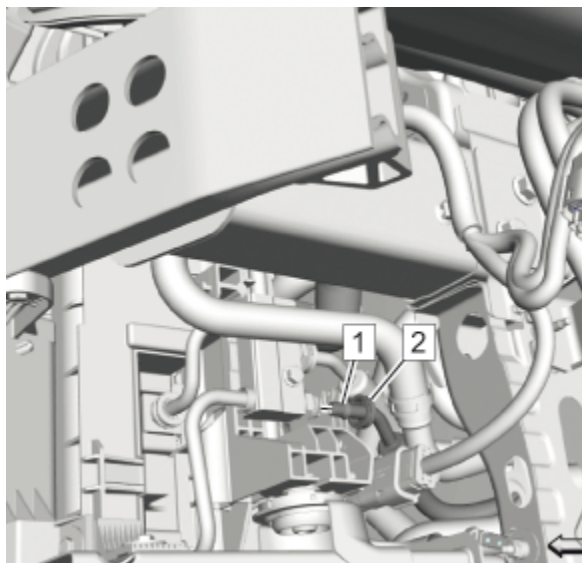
Transmission Fluid Cooler Pipe Connector Cap
